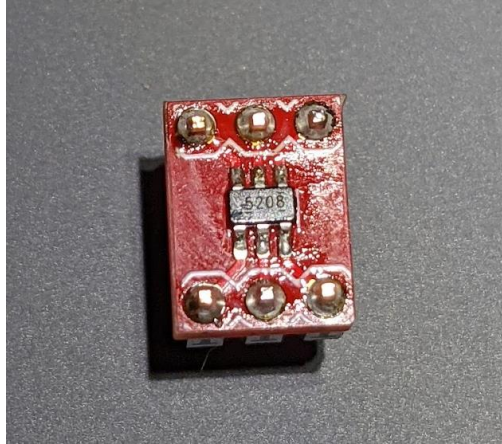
TPS565208 soldered onto SOT-23 breadboard adapter
